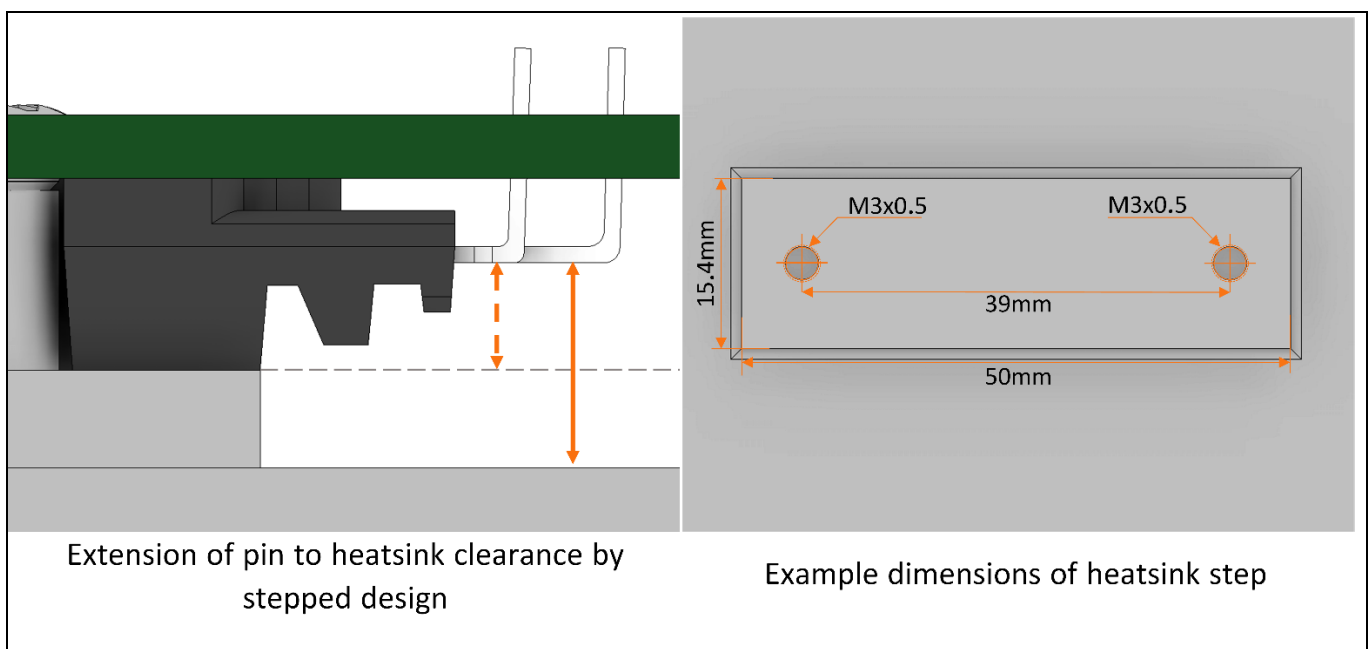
Stepped heatsink design for extended pin to heatsink clearance
